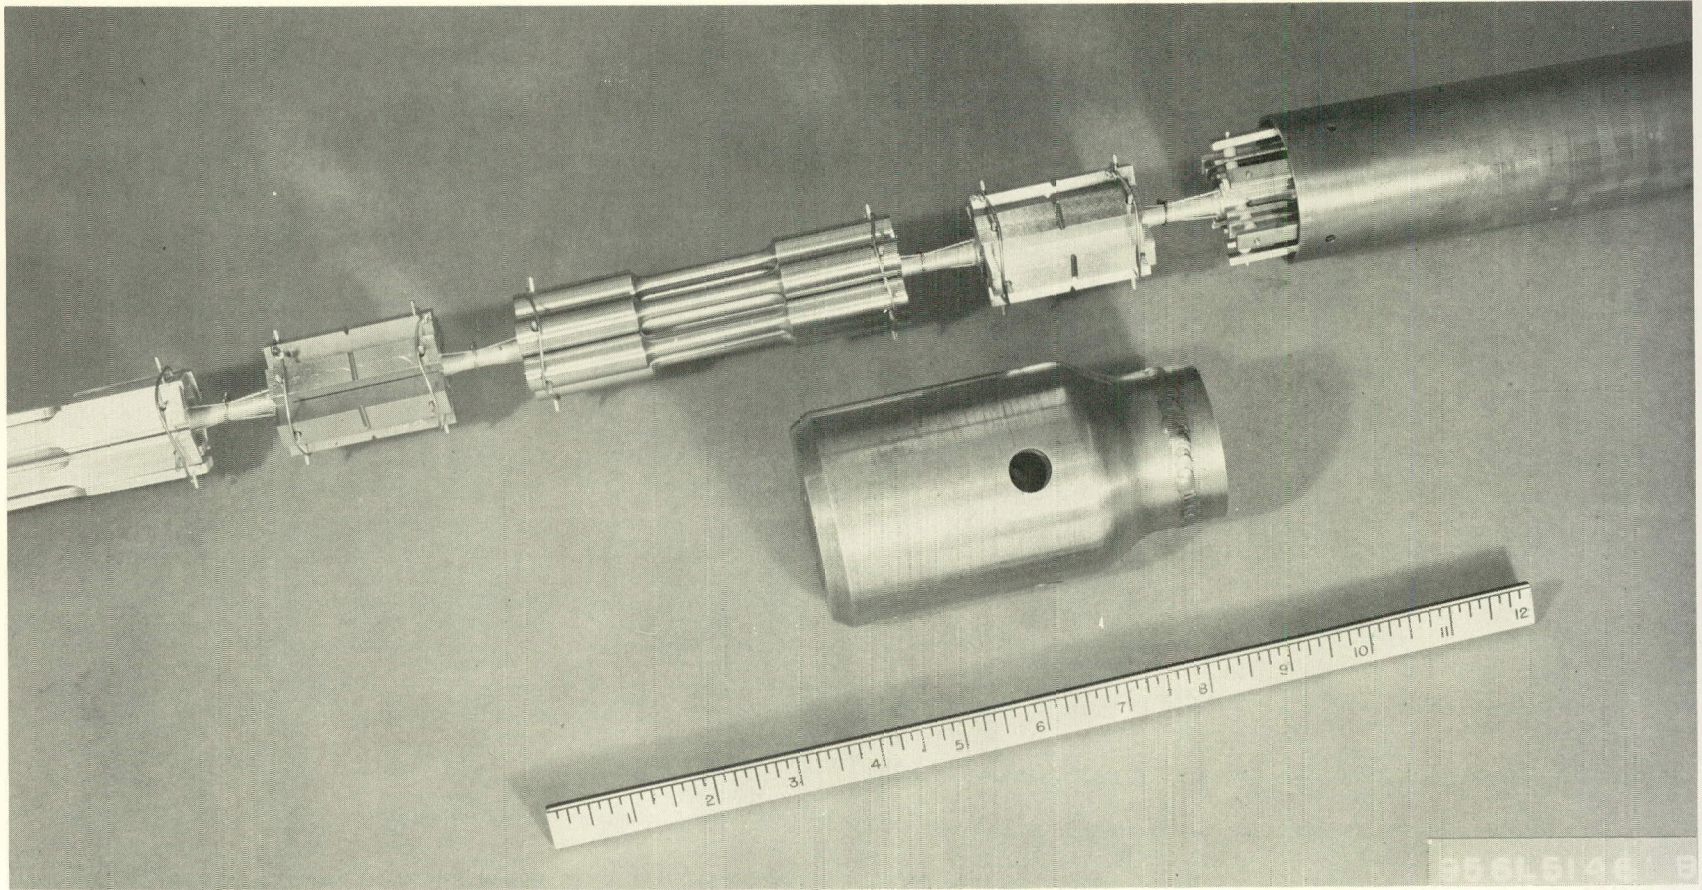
Specimen Being Loaded into OMRE Dummy Fuel Element
